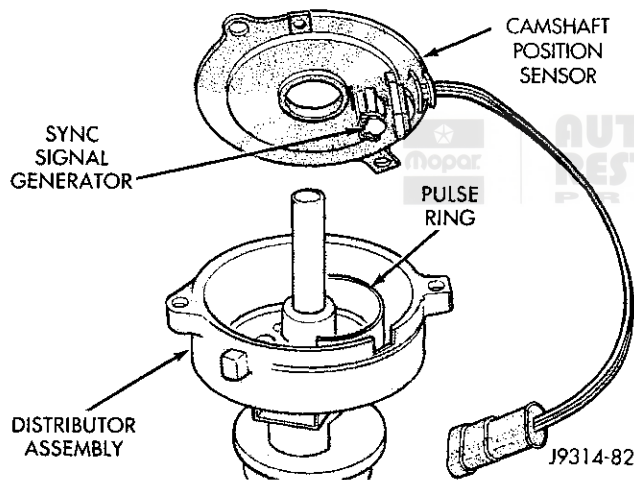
Distributor and Camshaft Position Sensor—Typical
